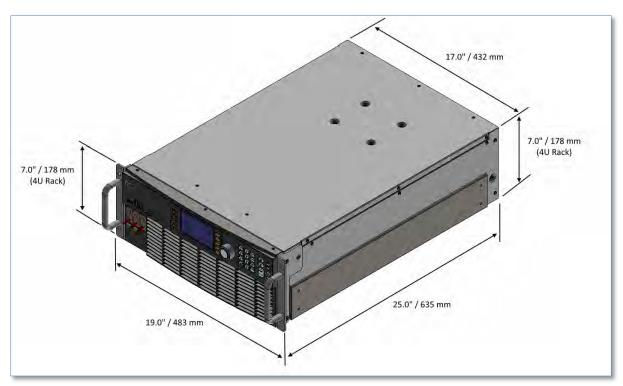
Dimension Drawing AFX Series® 15KW Model
